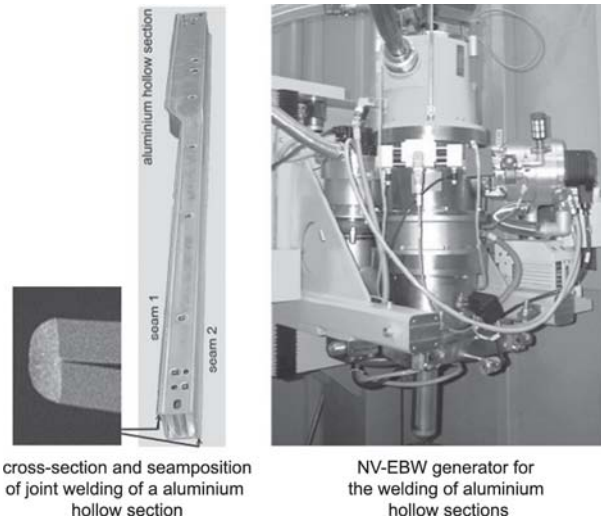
NV-EBW Gun and Aluminium Hollow - Section Welding, (Courtesy: Steigerwald)
